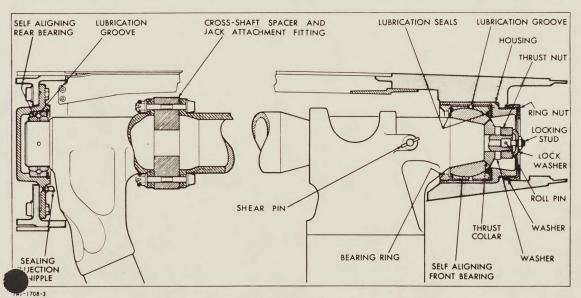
CROSS-SHAFT AND PIVOT BEARINGS
